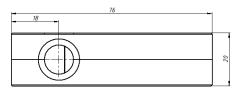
Promix-SM.420.10 lock overall and mounting dimensions
